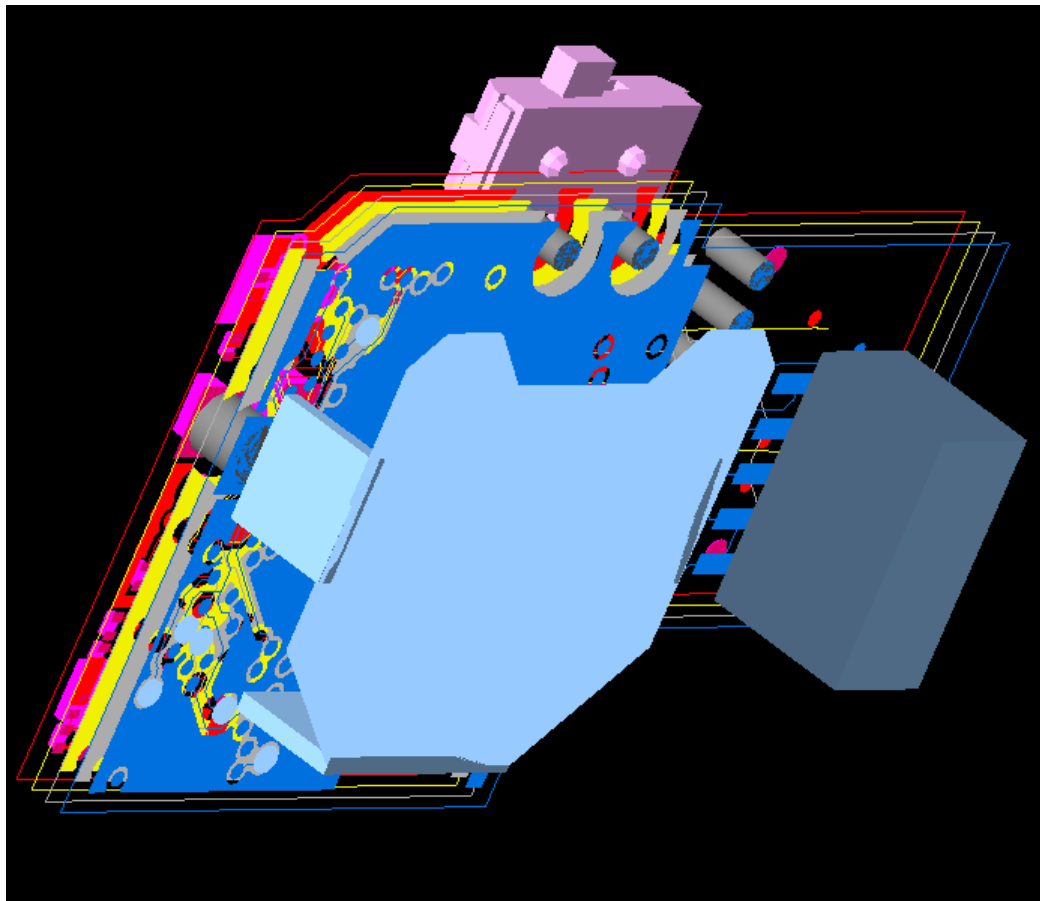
IoT Sensor reference board: 3D bottom view with battery holder (Rev. F)
